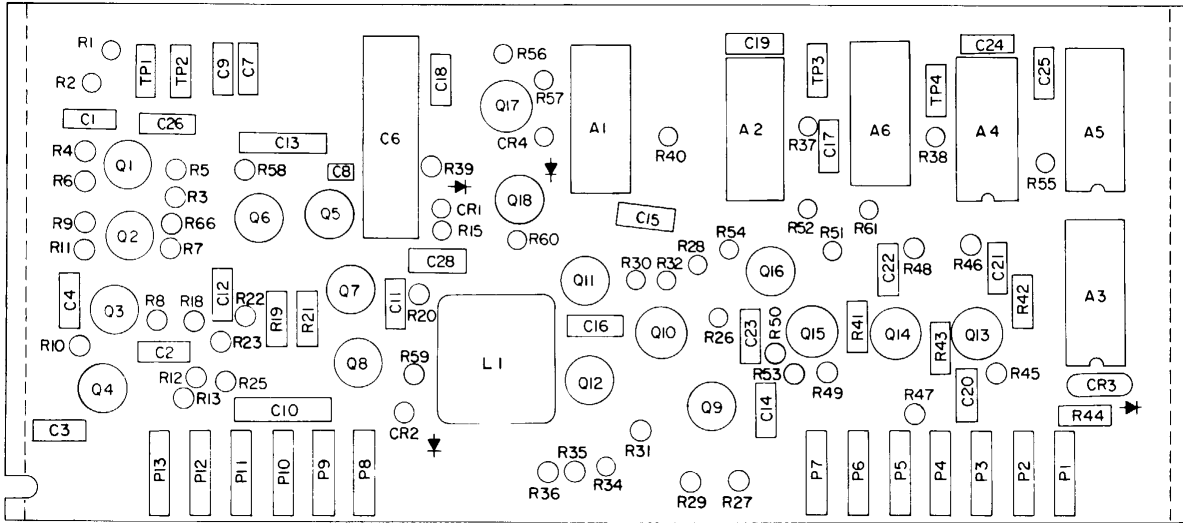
Comparator-Decoder Assembly (01A233758-21-11, -12) (A4), Component Locations (Sheet 1 of 2)
